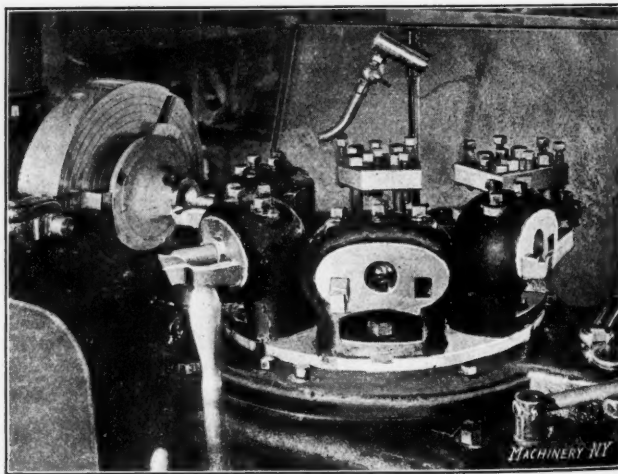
The First Turret Lathe Operation in Finishing the Gear Case Covers
